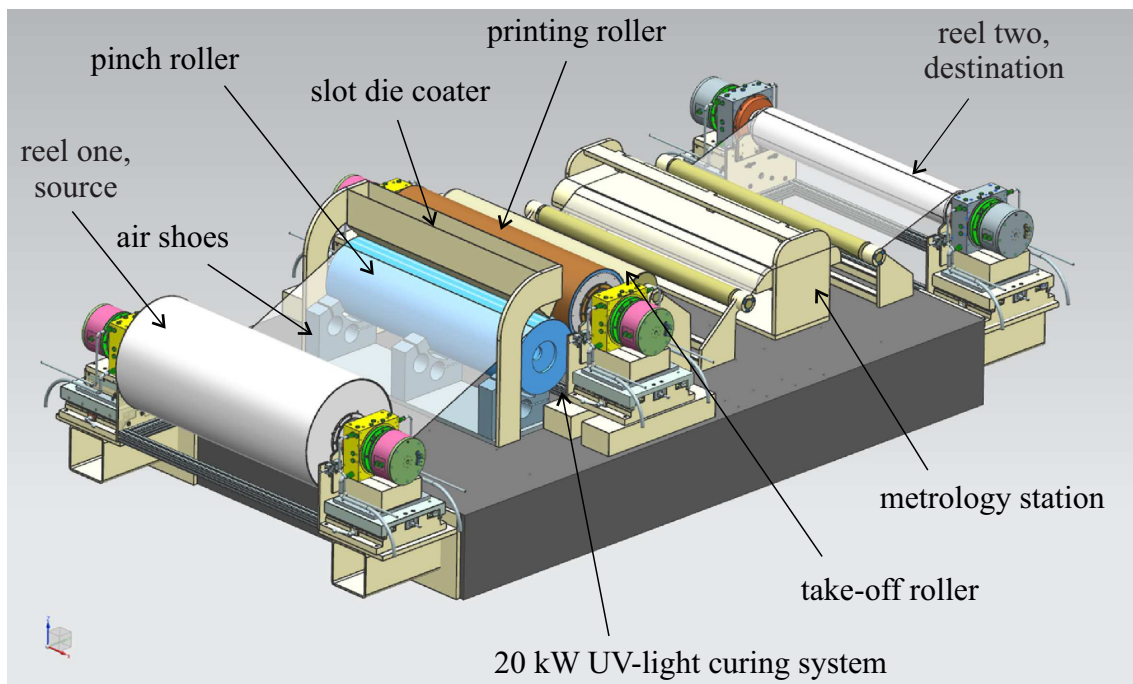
CAD image of roll-to-roll machine layout generated in Siemens NX by Roger Read from Cranfield University
